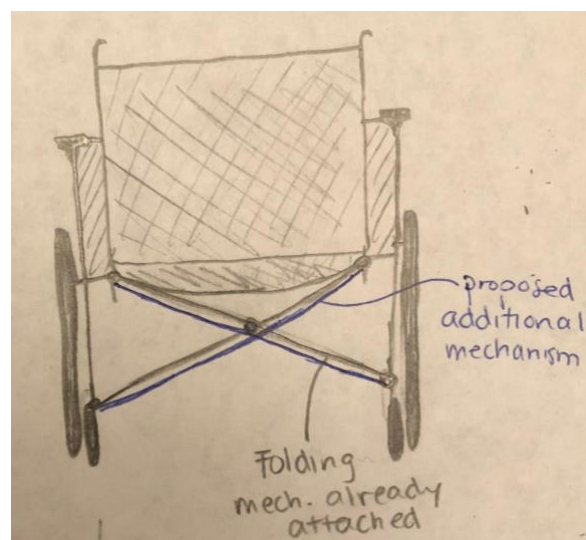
X-frame folding mechanism for attaching drive unit to wheelchair drawn by Matthew Marks
